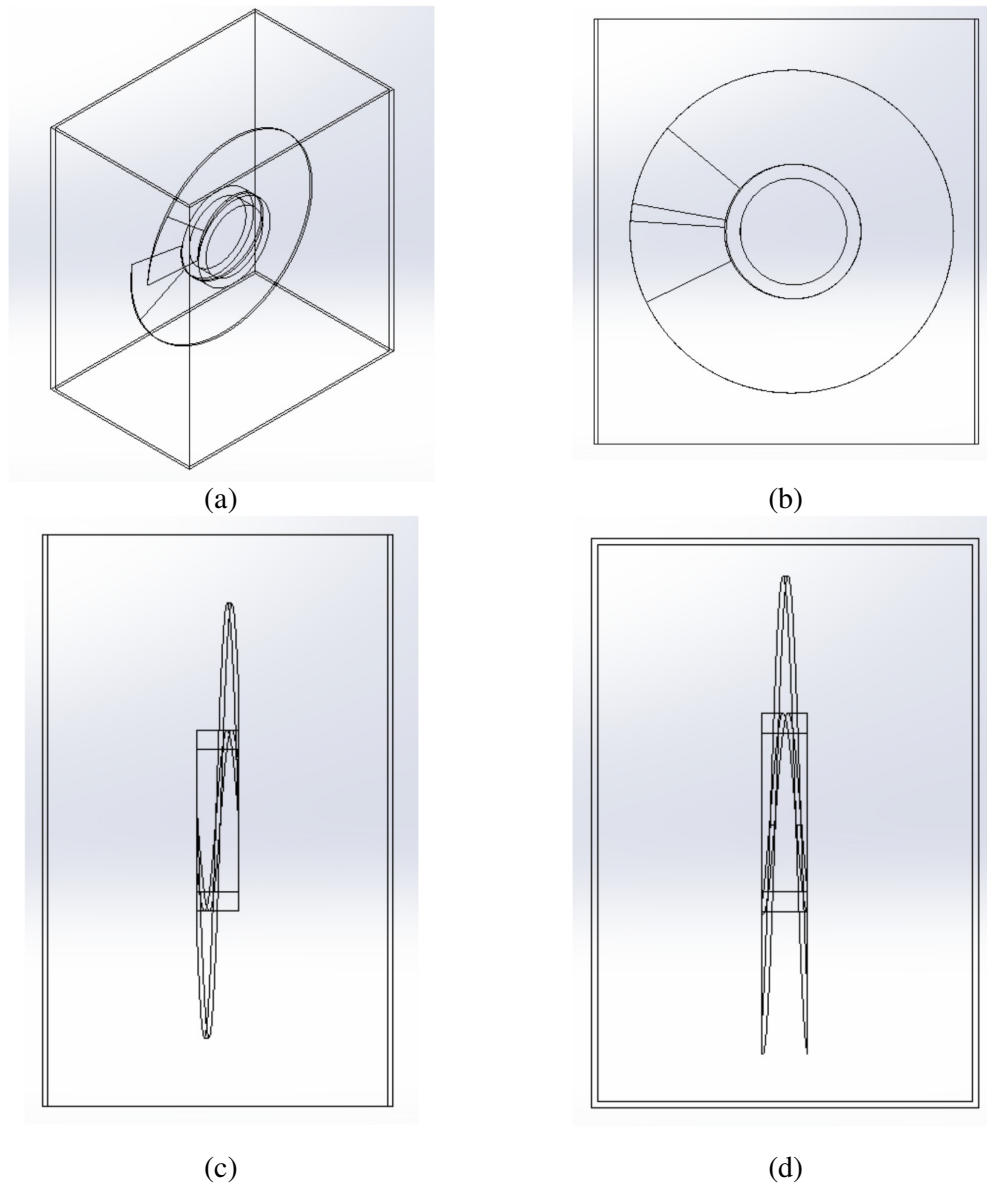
(a) isometric (b) side (c) front (d) top wireframe view of fin tube section with rectangular domain
